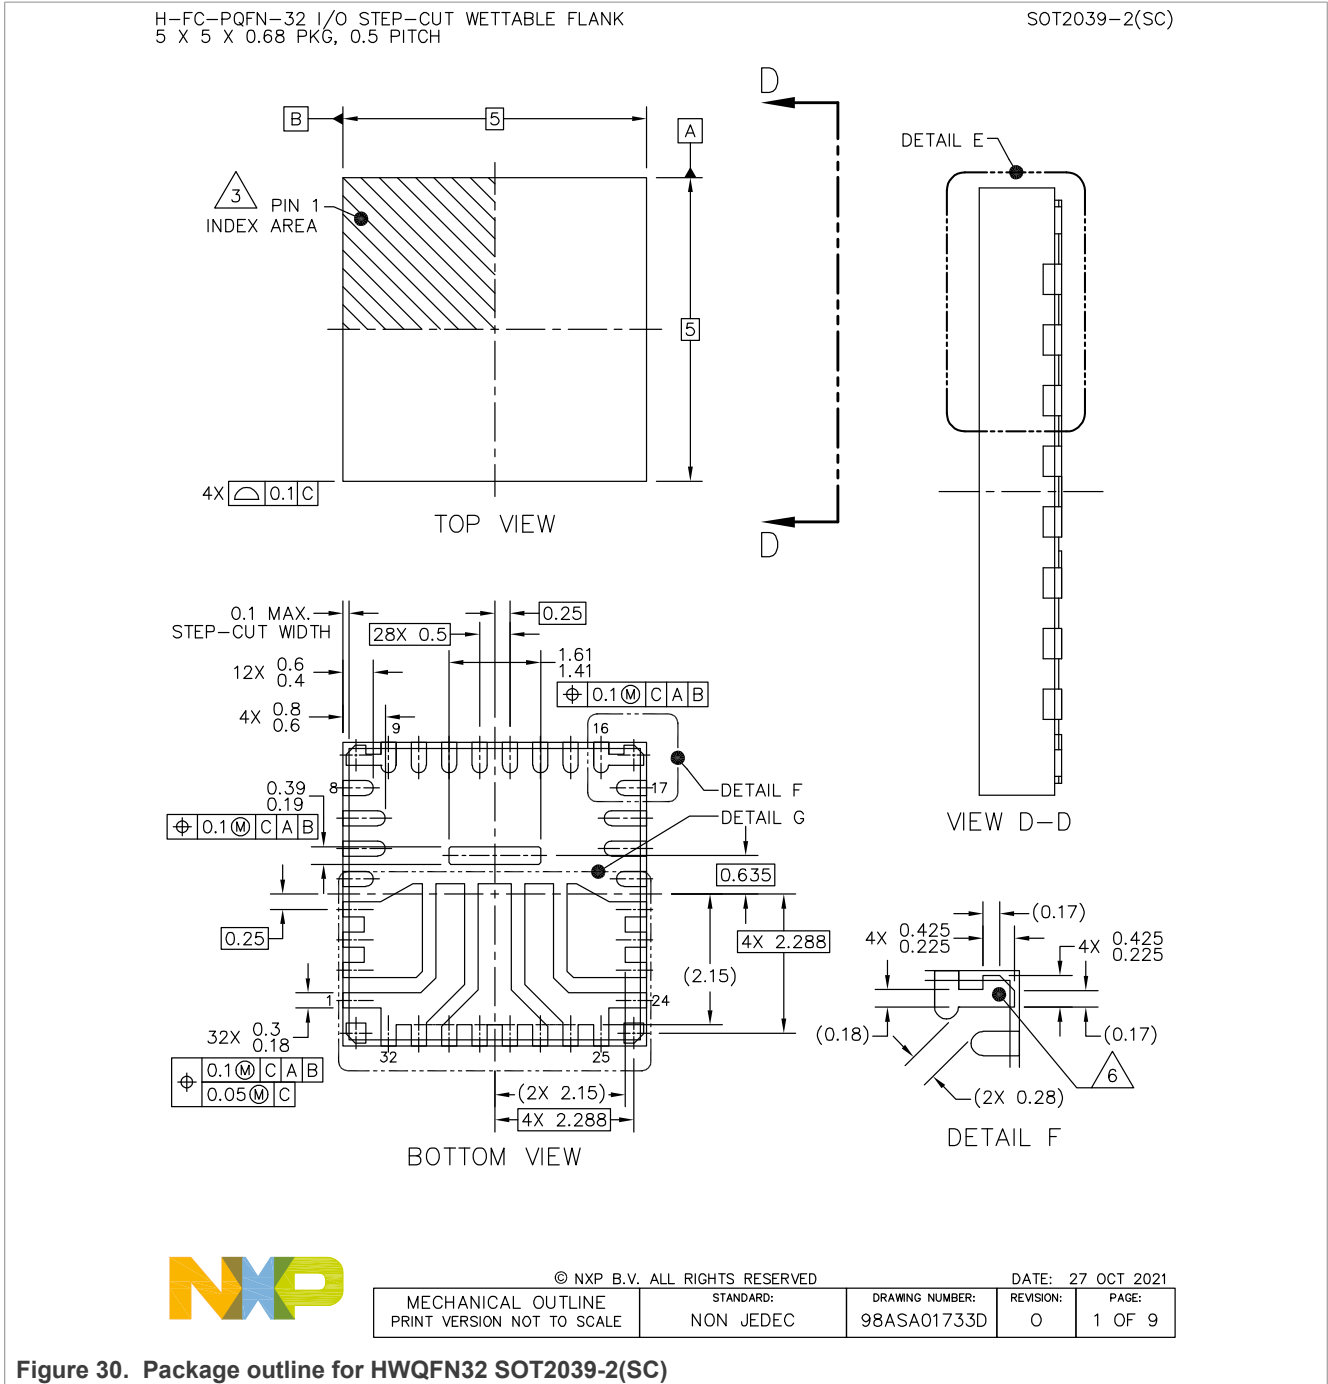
Package outline for HWQFN32 SOT2039-2(SC)
